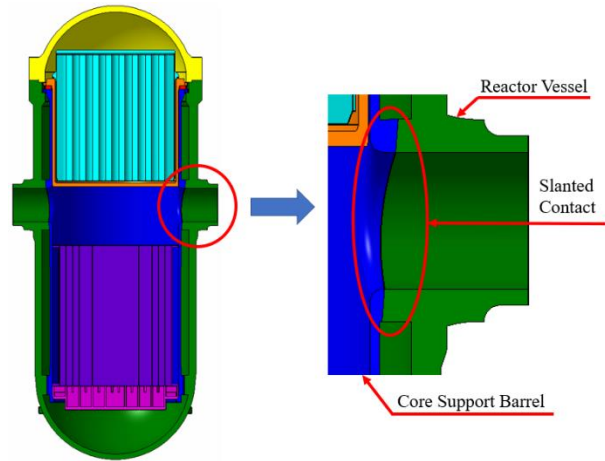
Slanted contact between RV outlet nozzle and CSB outlet opening
